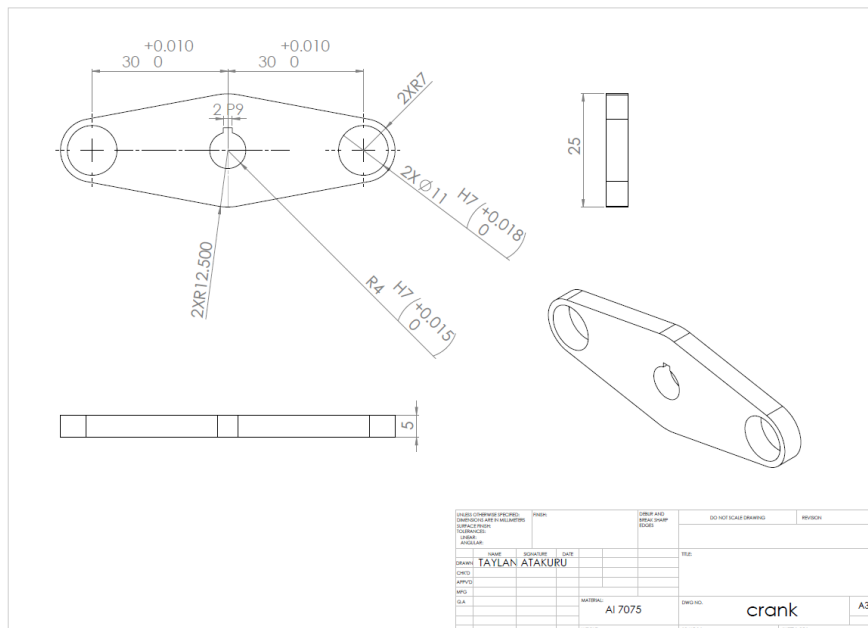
Technical drawing of the crank of the slider-crank mechanism.
